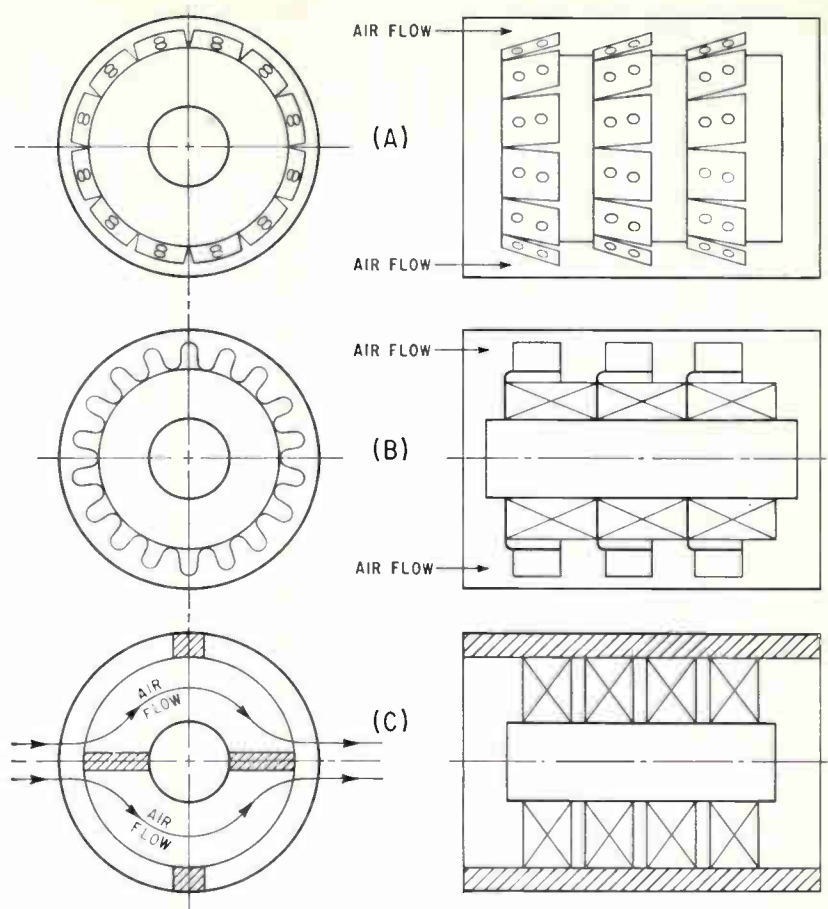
Folded-tab cooling fin design (A); extended-surface cooling fins (B) spaced-wafer cooling design (C)
